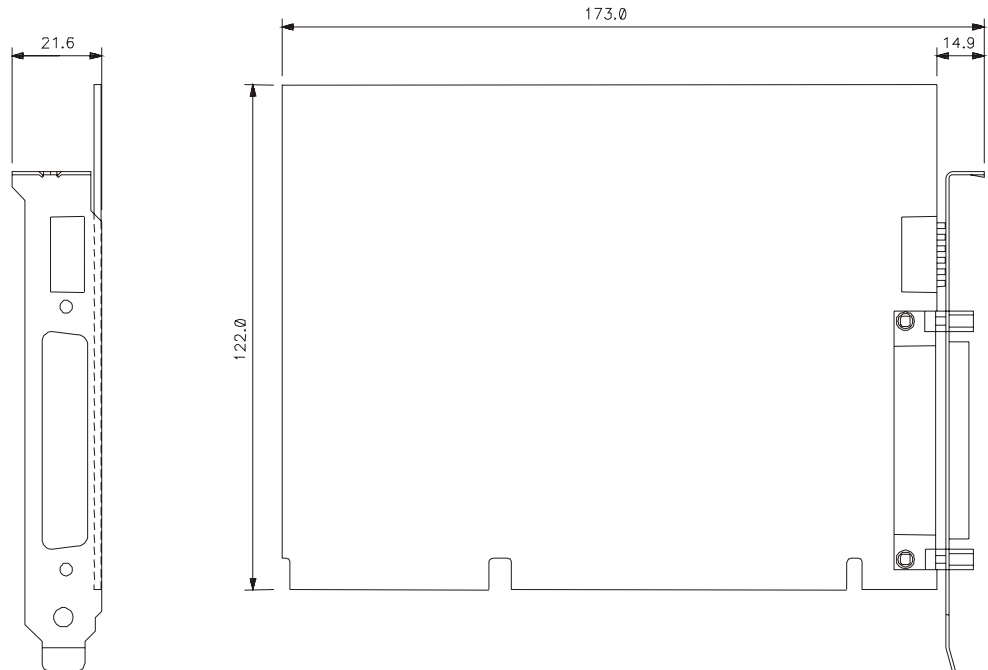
PCI302 card V1.2x Physical dimensions (mm).
